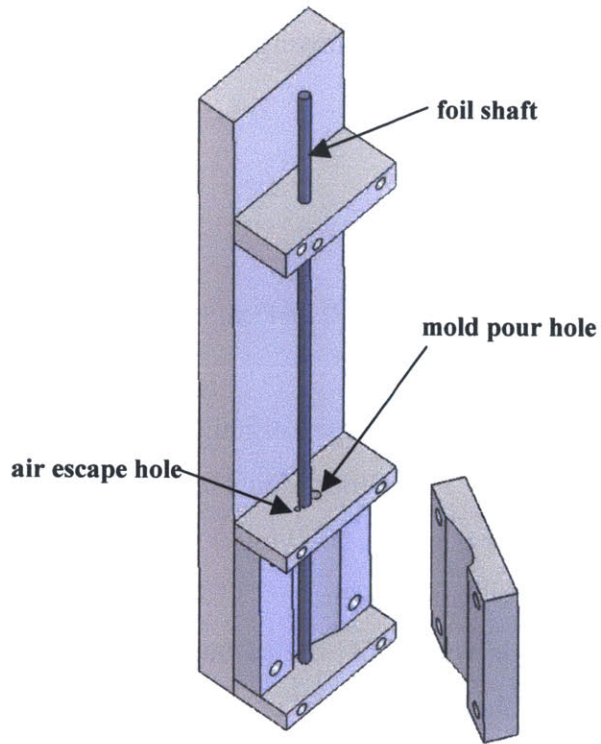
The mold setup for making foils. The shaft is aligned by the set up. Once the mold is bolted closed, the foil material is poured through the mold pour hole. There is a second smaller hole which allows air to escape from the mold.
